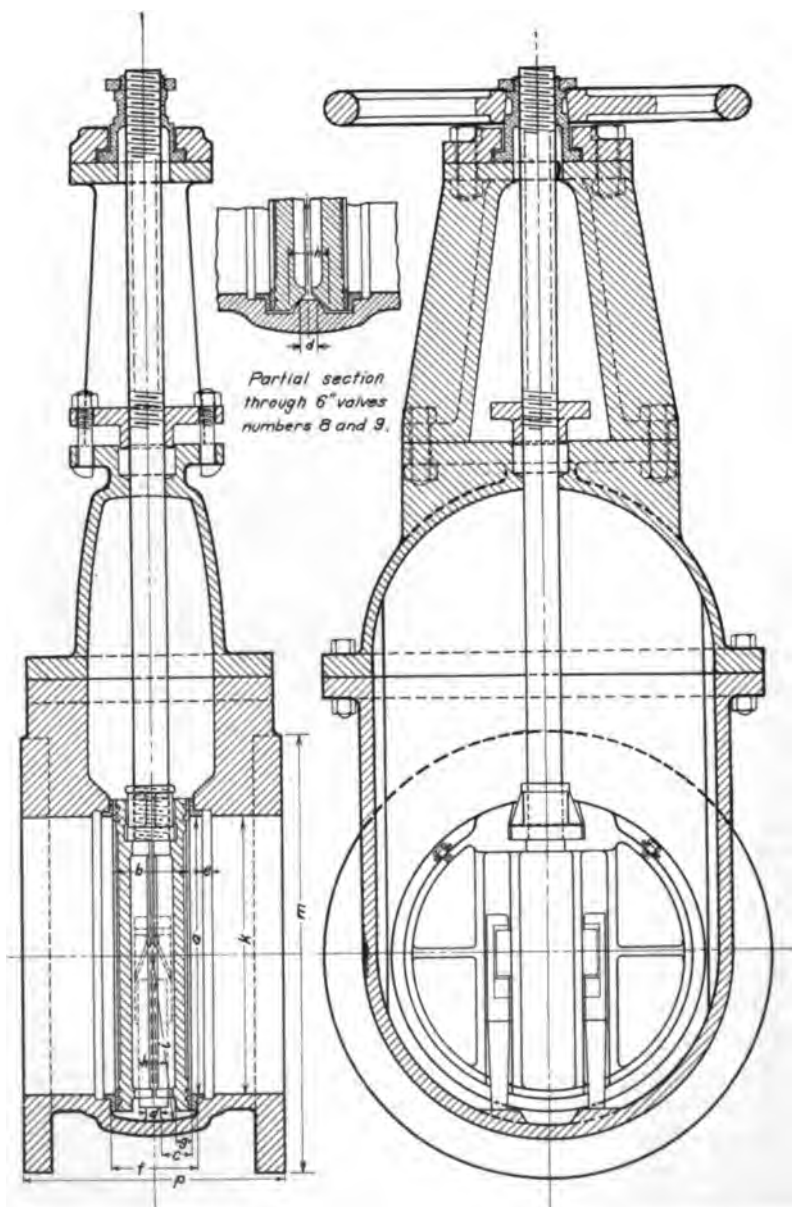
Drawing of 6, 8, and 12-inch Chapman Gate Valves. Dimensions Given in Table 1, Page 24.
